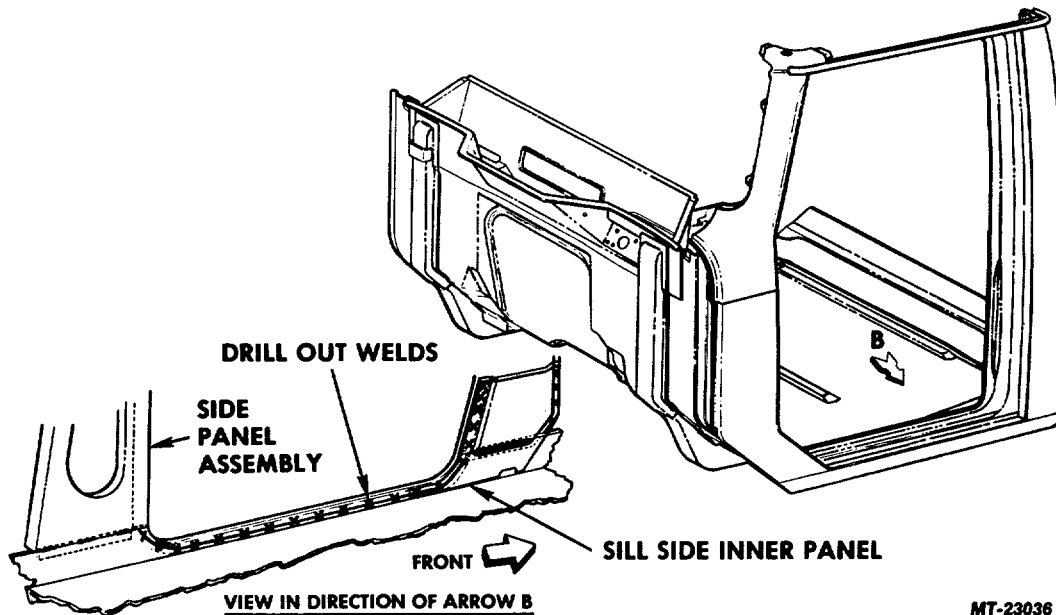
Side Panel To Sill Side Inner Panel Spot Welds
